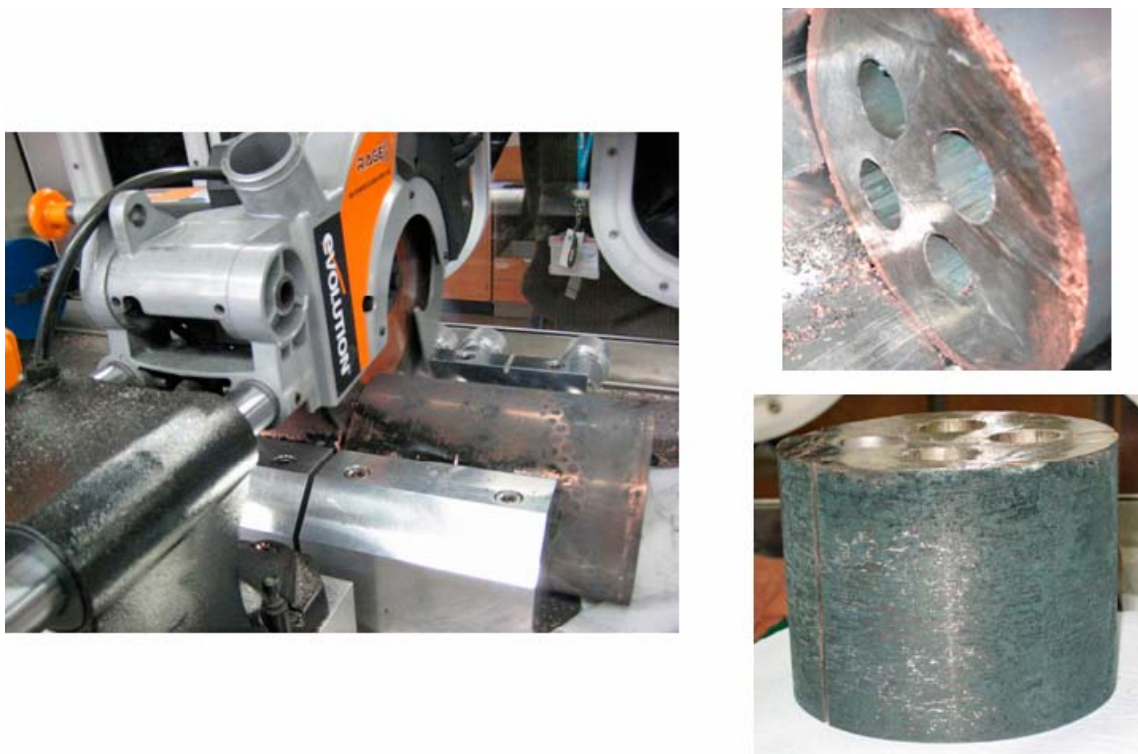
Appearance of outer surface of cast iron insert – top section (2).
